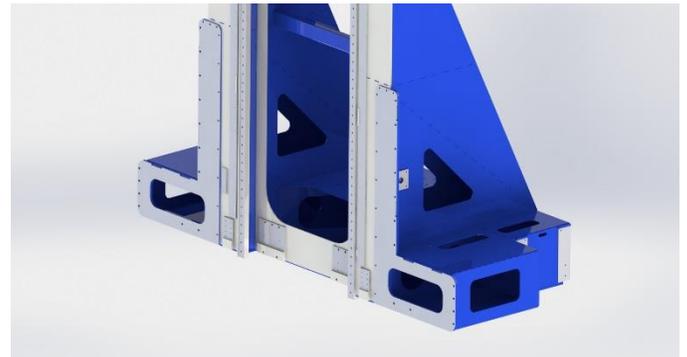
Side bolster and platform deck are designed to be a structural plinth and mounting surface, with good access from top and sides
